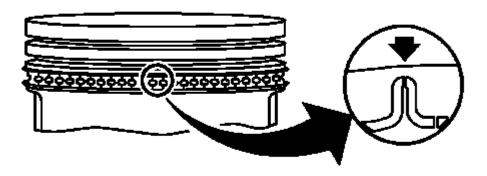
View Of Lower Oil Control Piston Ring Spacer Courtesy of GENERAL MOTORS CORP.
